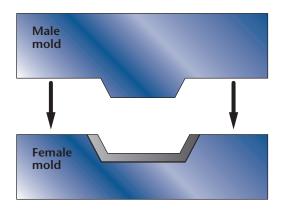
Compression molding is normally used to manufacture many precision formed parts.
